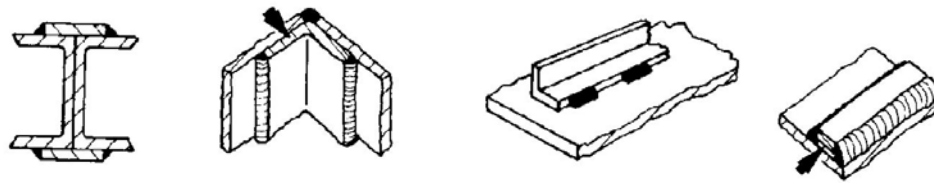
Destructive connections should be avoided (source: Bralla, 1986).
